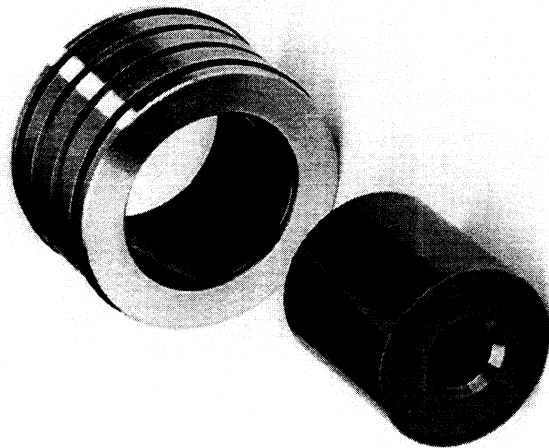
Test Bearing, Rotor and Sleeve Assembly
